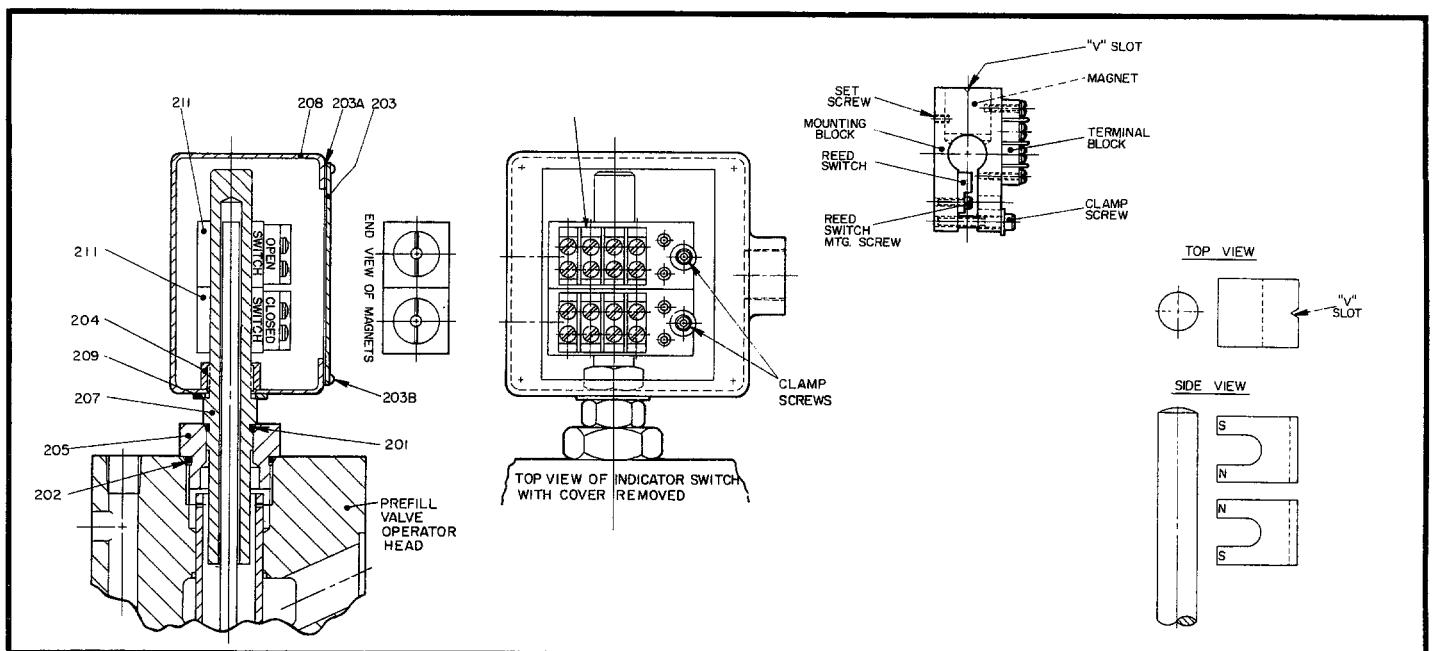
Parts Drawing, Type "M" or "L" Indicator Switch Assembly (508280C sht. 6).
